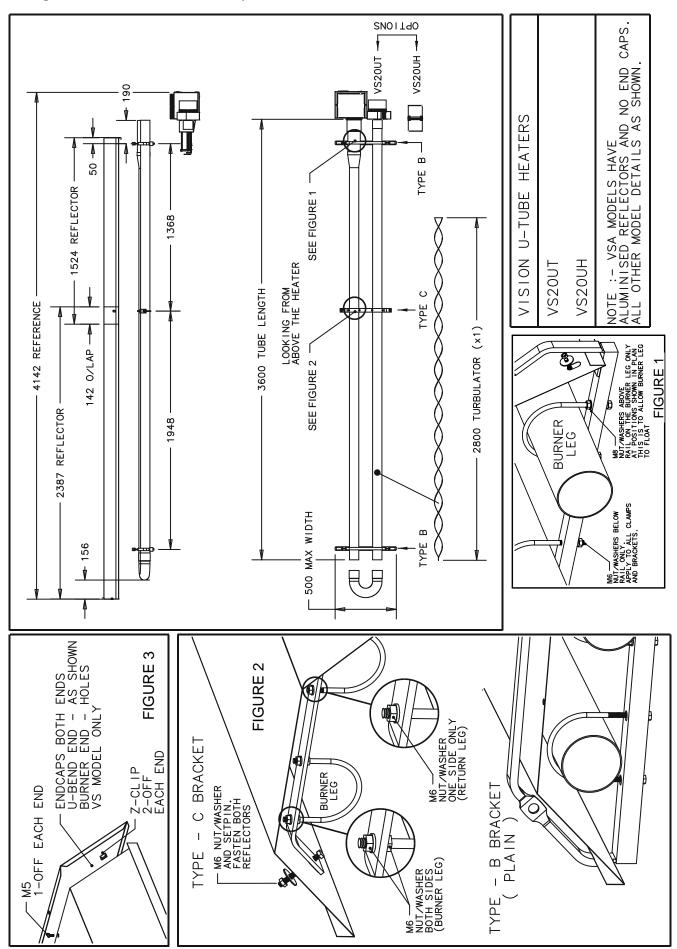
Vision Heater Assembly: Models VS/VSA U tube 25kW.
